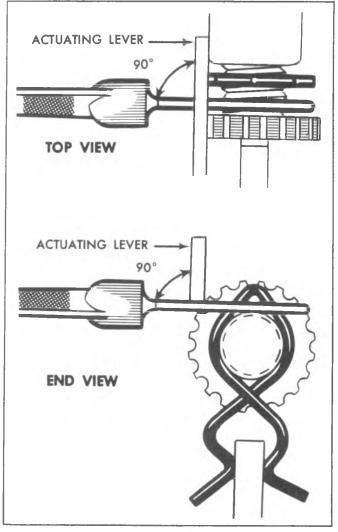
Pull Gage Positioning for Correct Actuator Lever Adjustment
